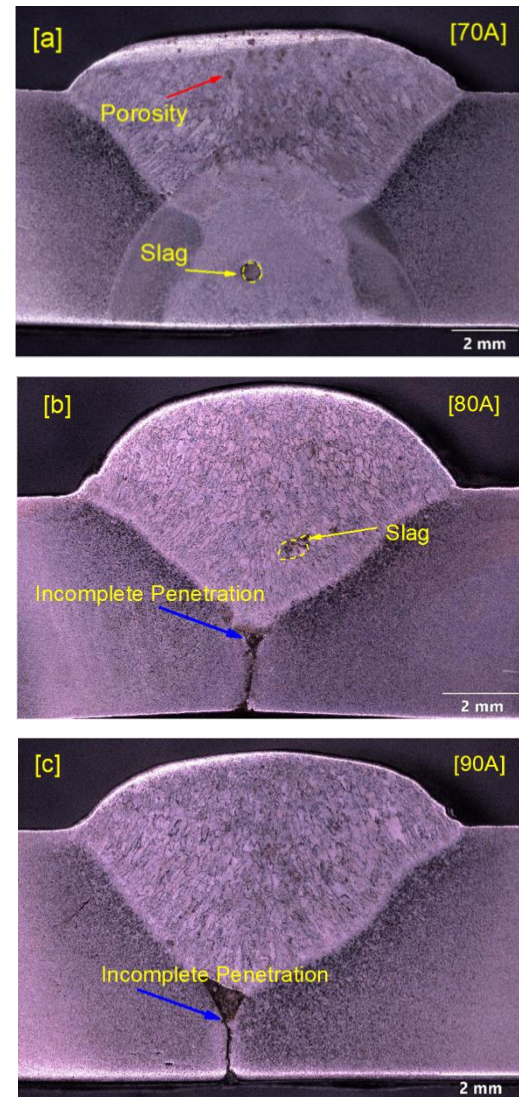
Macrostructure test of welding process with current parameters, (a) 70A, (b) 80A, and (c) 90A
